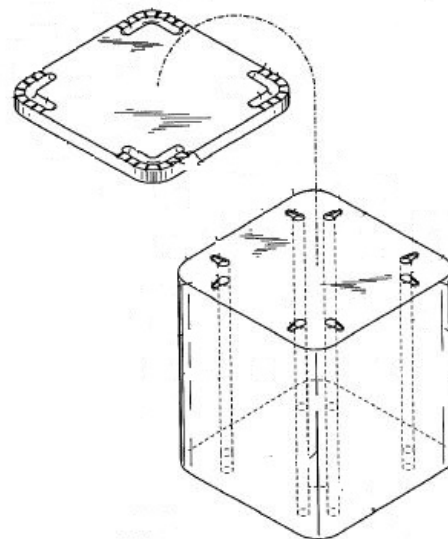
Cutting tool insert having internal microduct for coolant being assembled [8].
